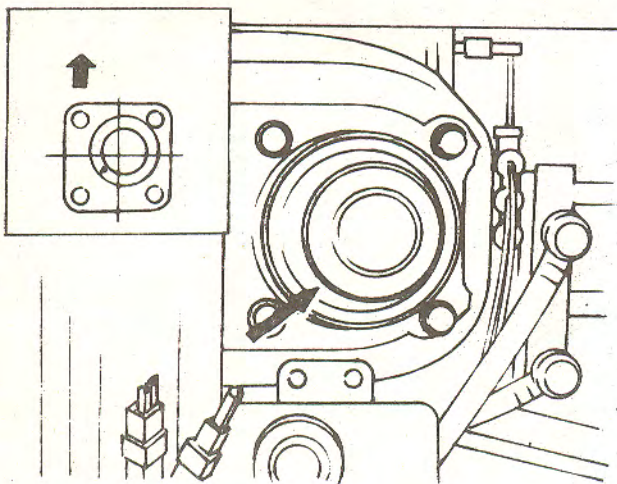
View of the upper spring strut (shock absorber) mounting, showing the offset for the camber and castor adjustment.
